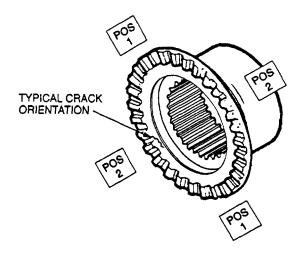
Tail Rotor Driveshaft Forward Coupling
